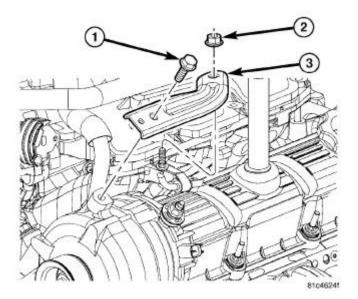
Removing/Installing Alternator Bracket Courtesy of CHRYSLER LLC
